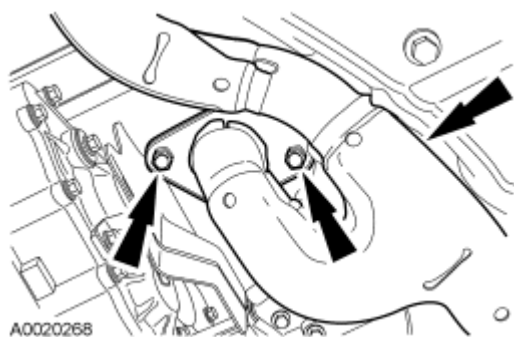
Rear Exhaust Pipe Flange & Nuts
